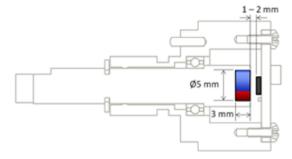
Example of a Potentiometer-Like Assembly Using Contactless Sensing with the MA800
